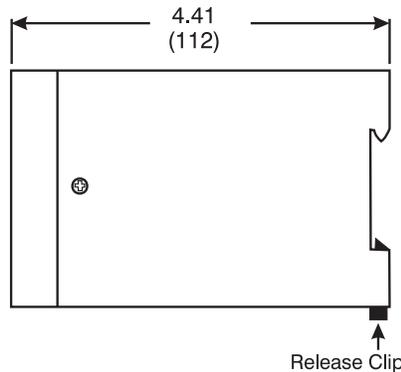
BE3 Case Size in Inches (millimeters) (Side View)
